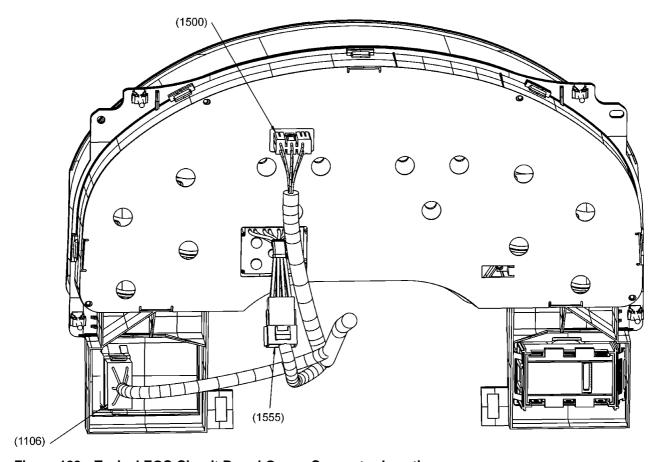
Typical EGC Circuit Board Gauge Connector Location
